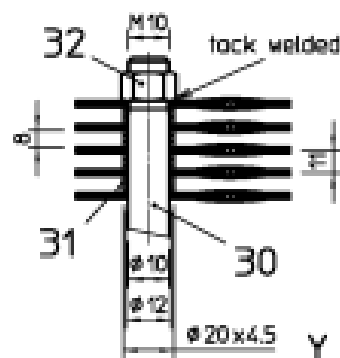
An extract from the design drawing, showing the spacer bolt assembly
